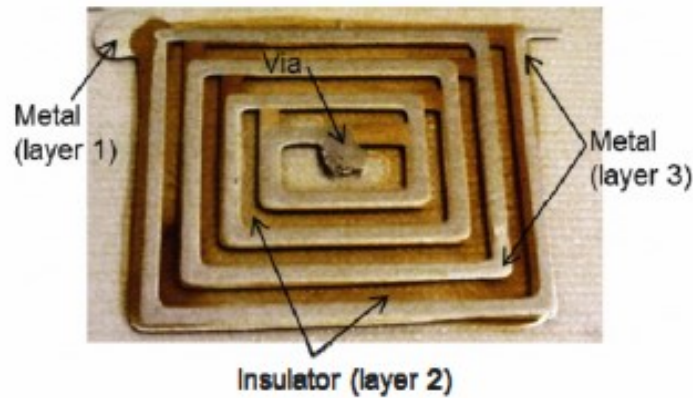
Three-Layer Coil Structure Manufactured Using Syringe Derived Materials. The Coil is 5.5 x 3.5 cm [28]
